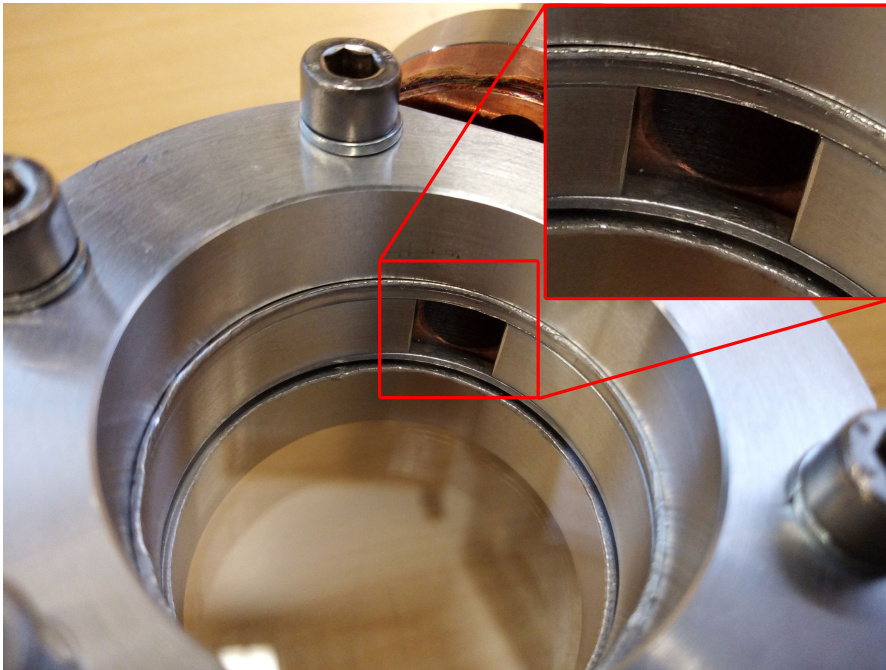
Close-up view of the assembled sample container showing the gas inlet and the gap in the central aluminum spacer ring. The layers from the top as shown in the inset are: aluminum clamp, indium wire gasket, silica window, first spacer ring ( $d = 1$  mm), second spacer ring ( $d = 9$  mm) with 9mm gas inlet gap, third spacer ring ( $d = 1$  mm), silica window, indium wire gasket, aluminum clamp.
